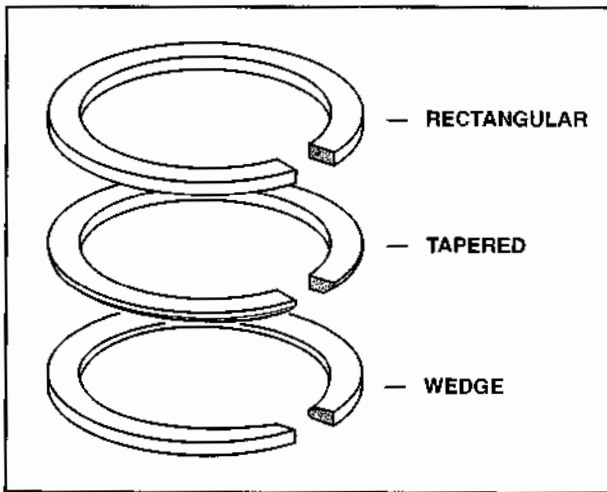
Compression rings can have three different ring cross sections. The tapered face presents the narrowest bearing edge to the cylinder wall to reduce friction and accelerate ring seating.
